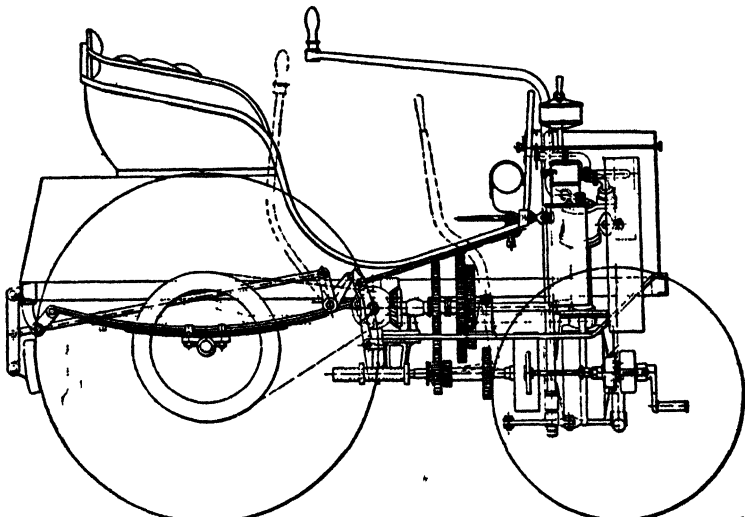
PANHARD-LEVIASSOR 1894 CAR, PROTOTYPE OF PASSENGER CARS WITH FRONT-MOUNTED ENGINES
